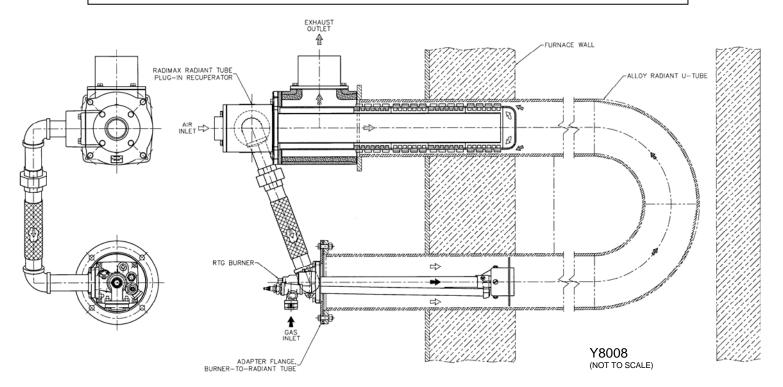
Typical Installation of RADimax Radiant Tube Plug-In Recuperator
